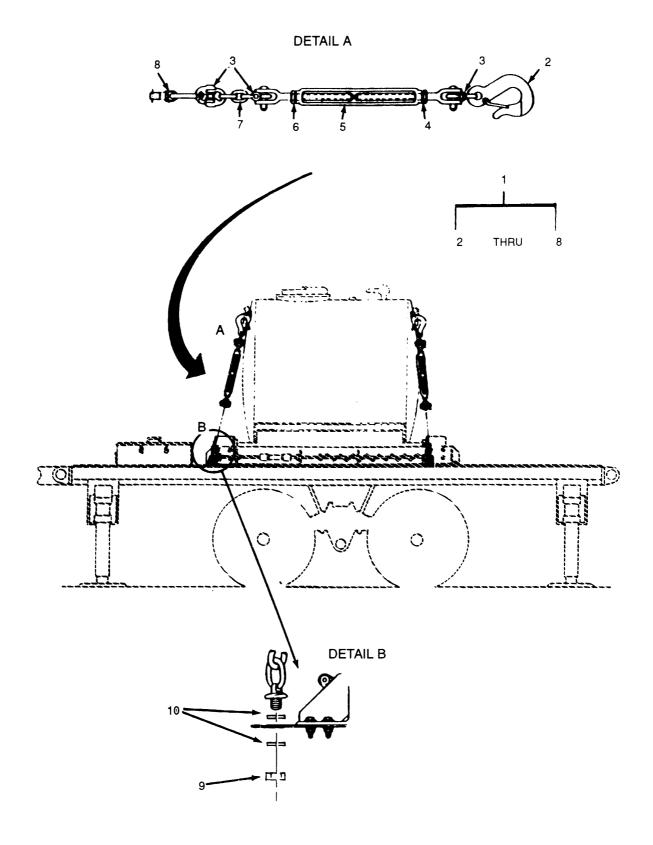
Hold Down Assembly (Sheet 1 of 2)
